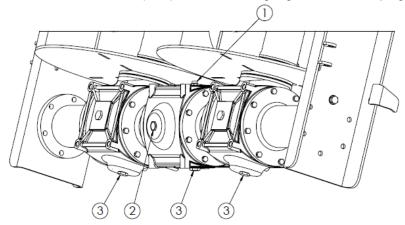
Oil level control points in the 2-auger vertical and 2-auger horizontal disc beater unit gearboxes
